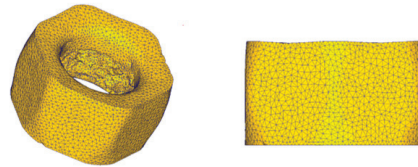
Completed blank for the fifth pass (left) and front view (right).
